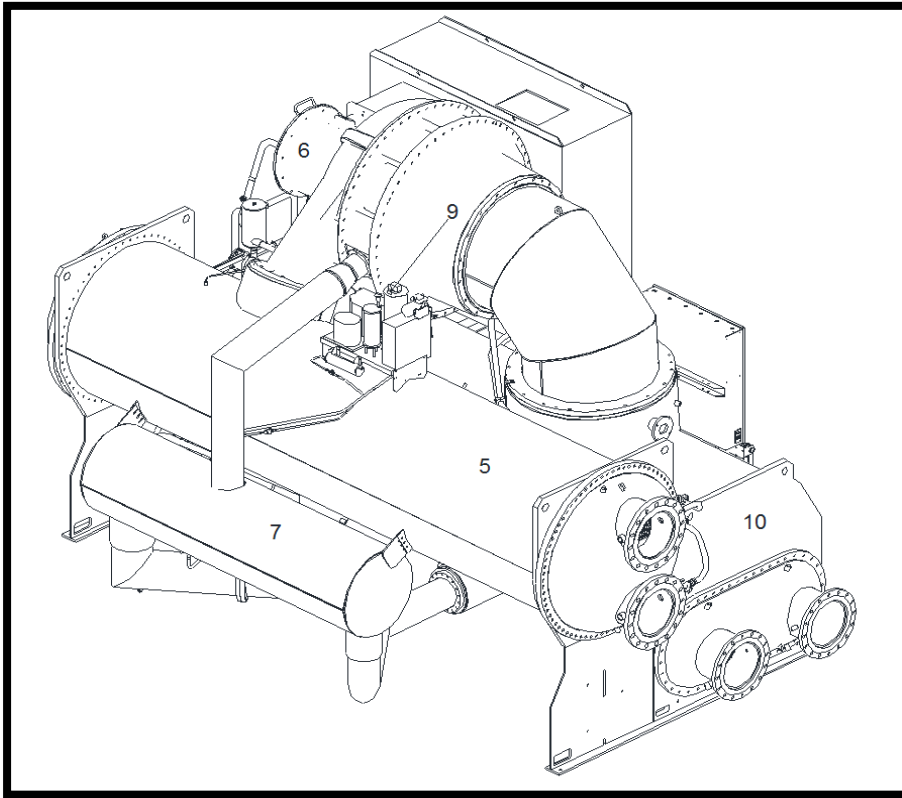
Back View of Condenser Left Side Outlet Cooling System
